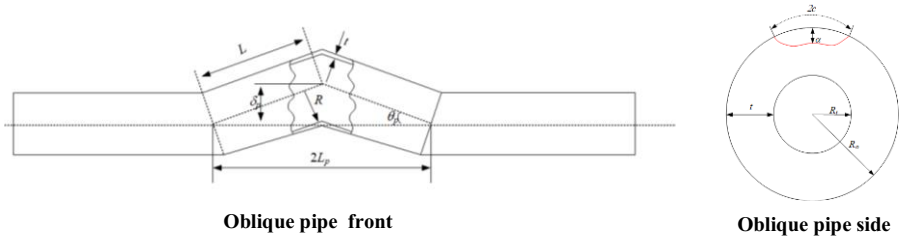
Full-size mitred pipe with circumferential surface crack defects
